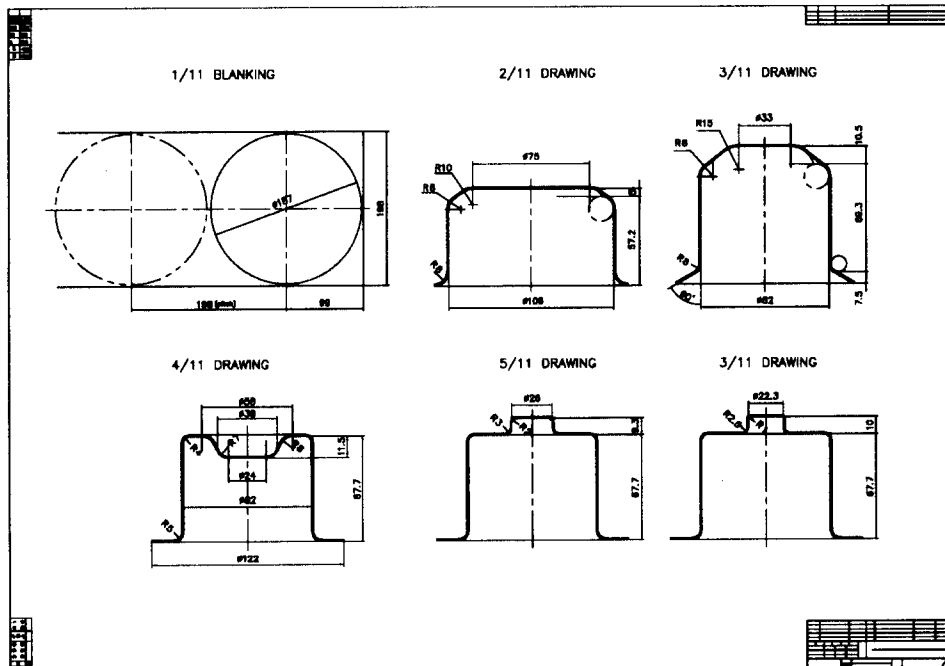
Sequence drawing for the deep drawing parts of the "Motor Housing"-Industrial practice
